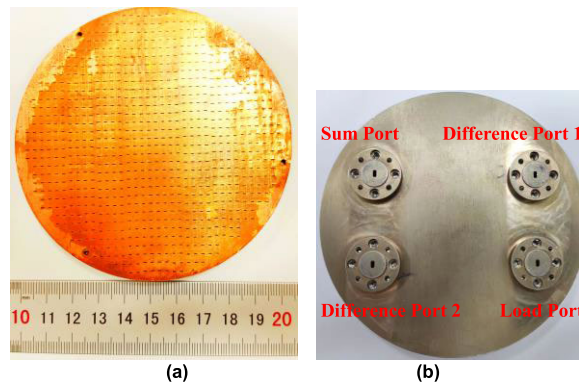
Photograph of the fabricated prototype. (a) Front view, (b) Back view.
